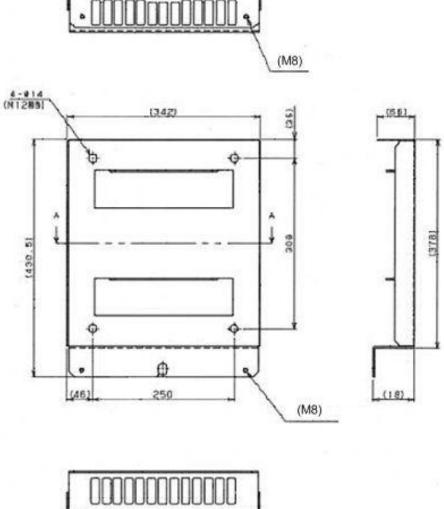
Wall Mounted Air4G-W24 Wall Plate Details
